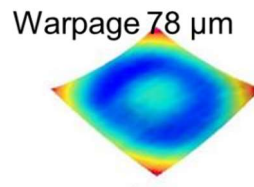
Warpage measurement of ultra-thin GPE package applying the double side process
